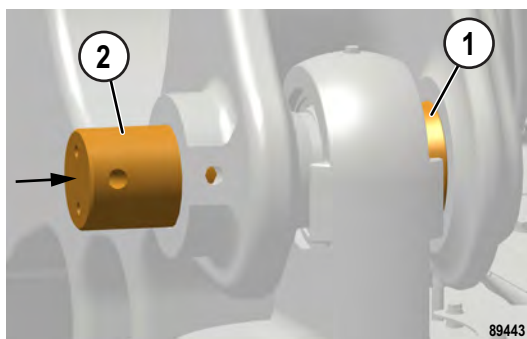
INNER BEARING SPACER INSTALLATION
